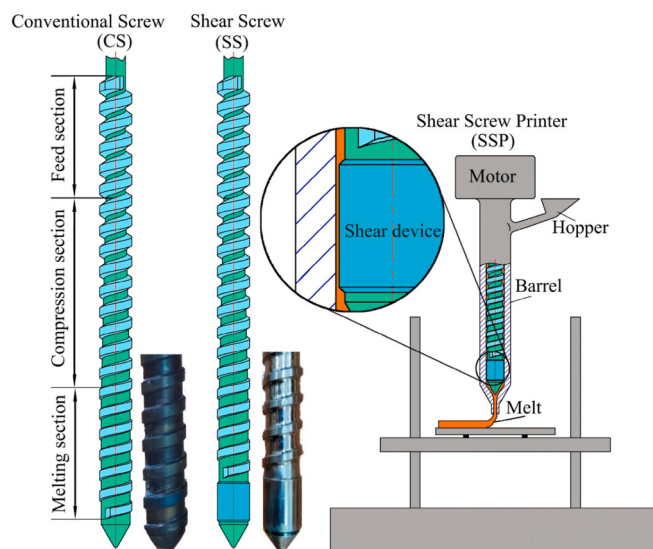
Schematic representation of conventional screw (CS), shear screw (SS), and shear screw printer (SSP), adapted from Ref. [62].
